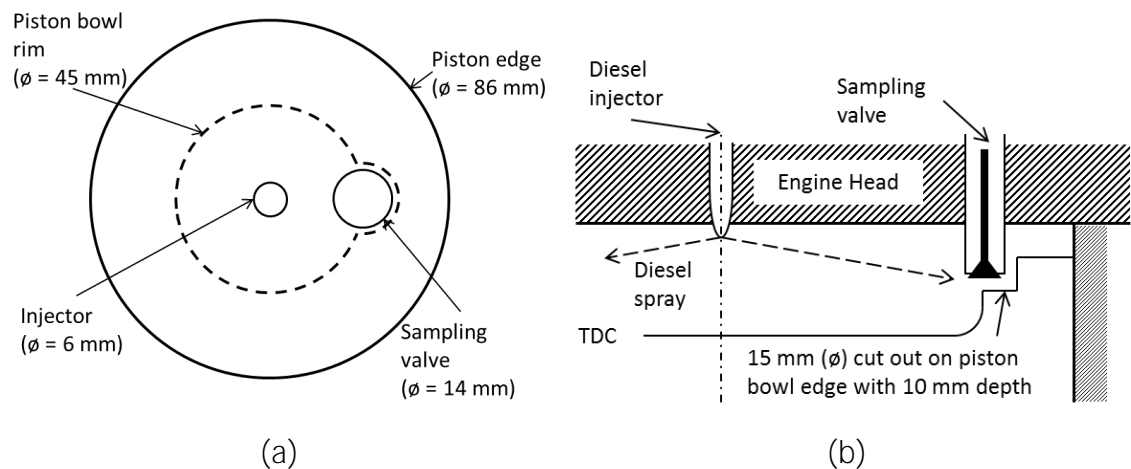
Schematic showing (a) plan view and (b) cross-sectional side view of the relative locations of the injector, the sampling valve at maximum in-cylinder penetration and the piston at TDC
